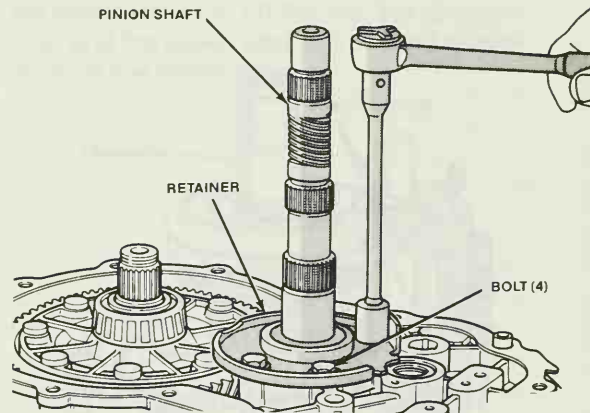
The pinion shaft retainer is removed by removing the retainer plate bolts. (Chrysler Corporation)
